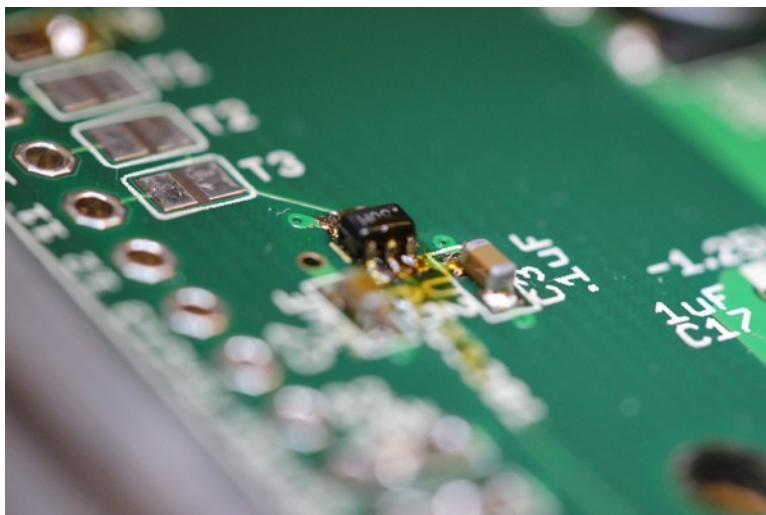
Often you will not have to re-apply solder after this process because there will be enough left over to maintain a good electrical contact. Once you are satisfied the flux residue can be cleaned using isopropyl alcohol
